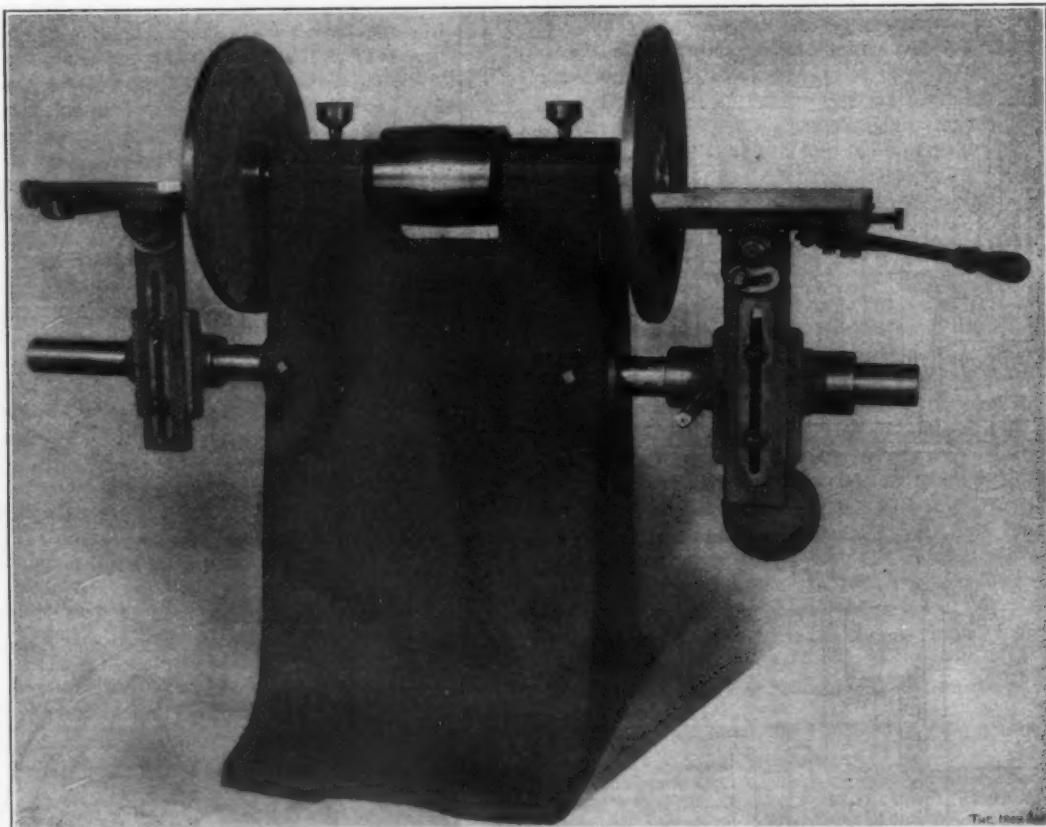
The No. 4 Gardner Disk Grinder with Right Hand Table Equipped with Lever Feed.
